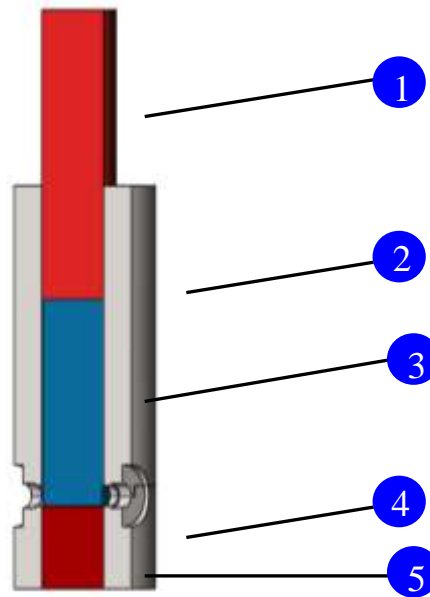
The tool for MNECAP as an assembly: 1 – punch; 2 – upper part of the container; 3 – work piece; 4 – lower part of the container; 5 – support
